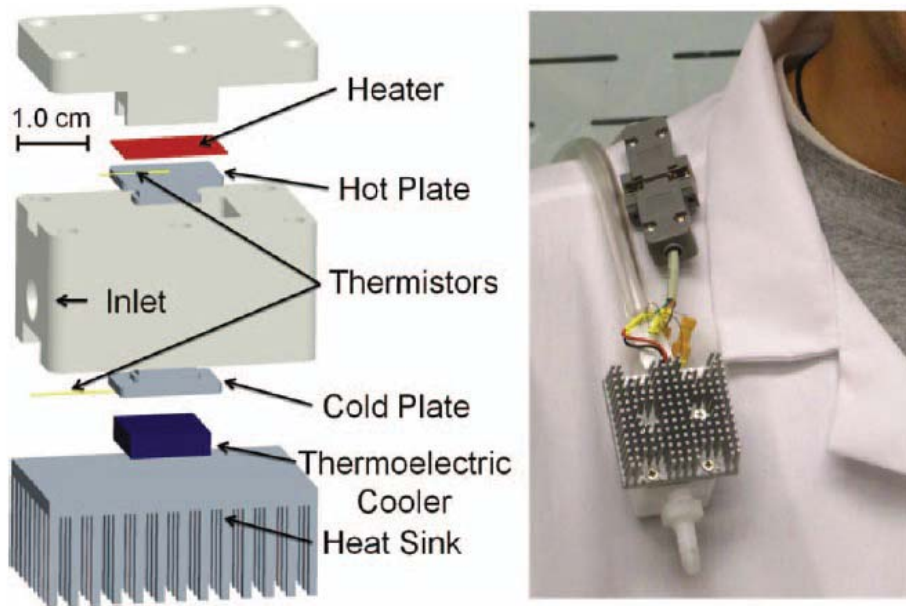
Exploded diagram and photograph of the prototype thermophoretic aerosol sampler [26]
